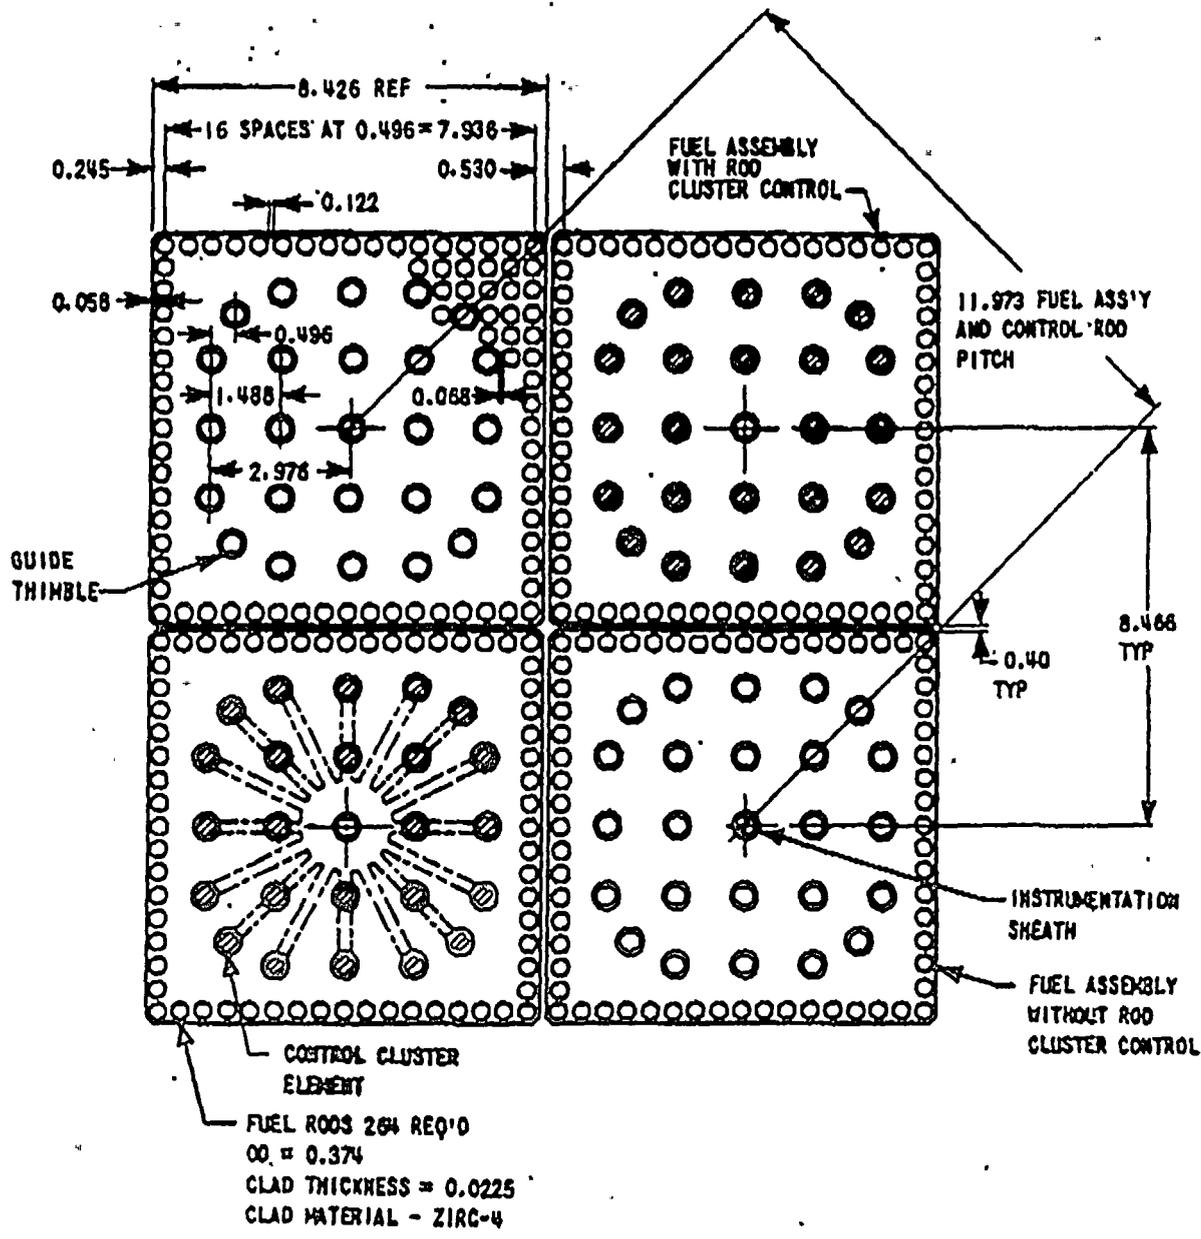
Westinghouse 17 X 17 Fuel Assembly, Cross-Section View
